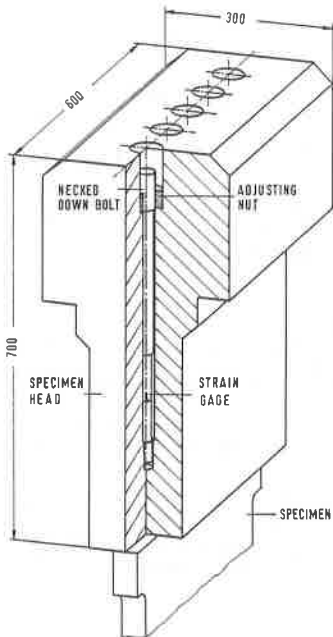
Specimen head for 12 MN-High Speed Tensile Machine with transducer for force measurement
